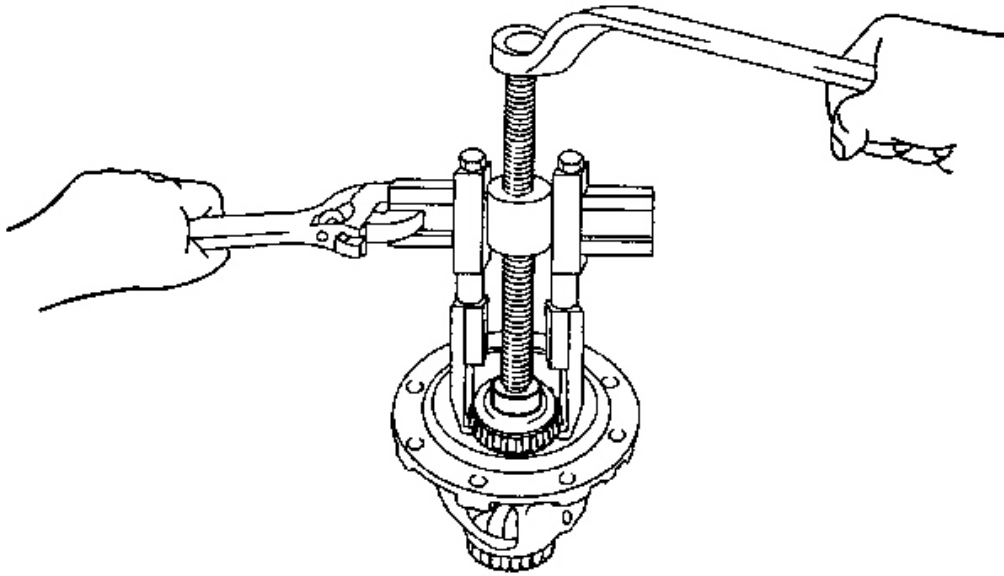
Removing Tapered Roller Bearing & Transaxle Case Side Using A Puller
